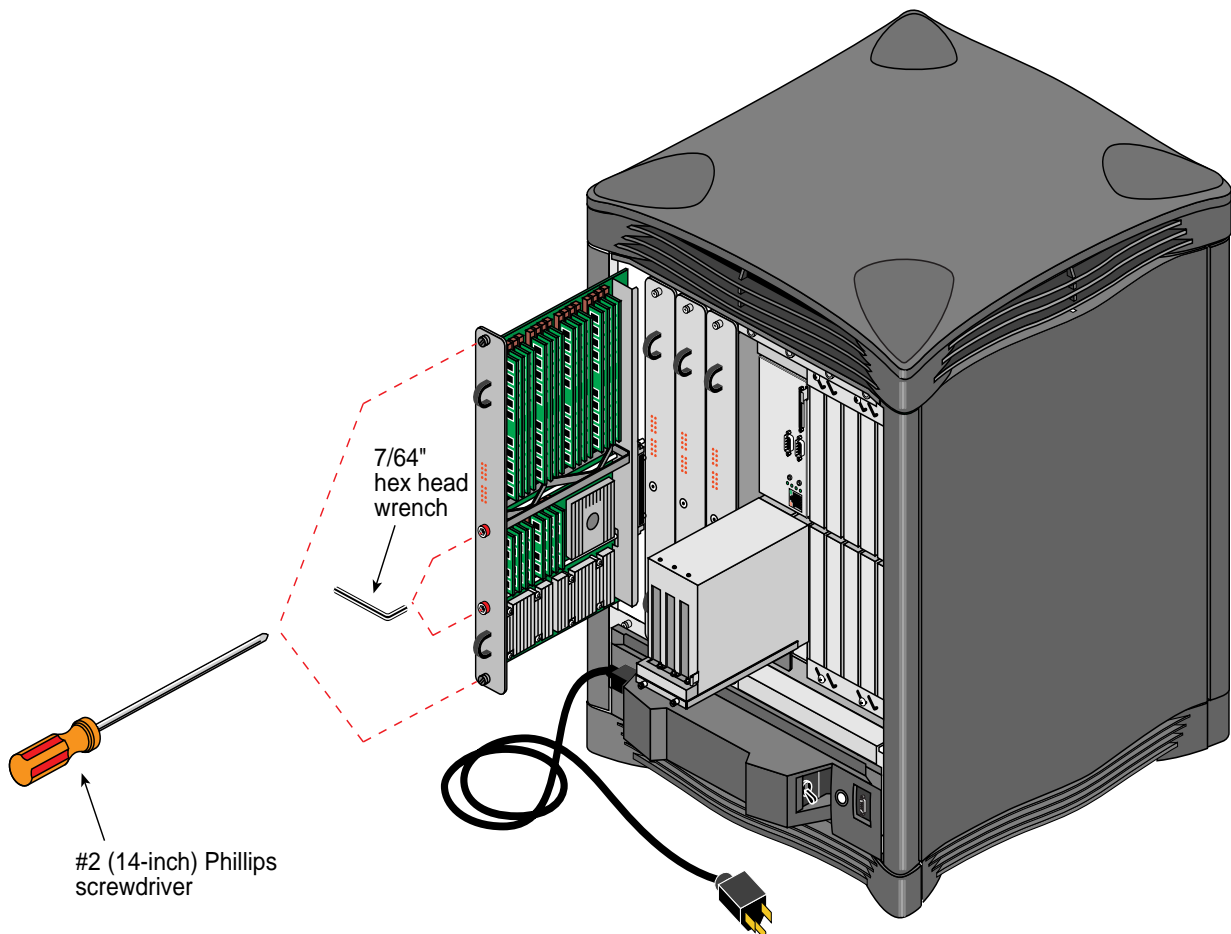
Removing a Node Board (Fourth Board Shown)
